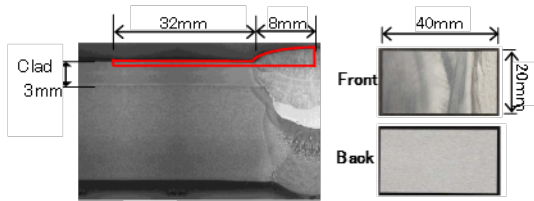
Cut-off plan of test piece for pitting corrosion resistance test
